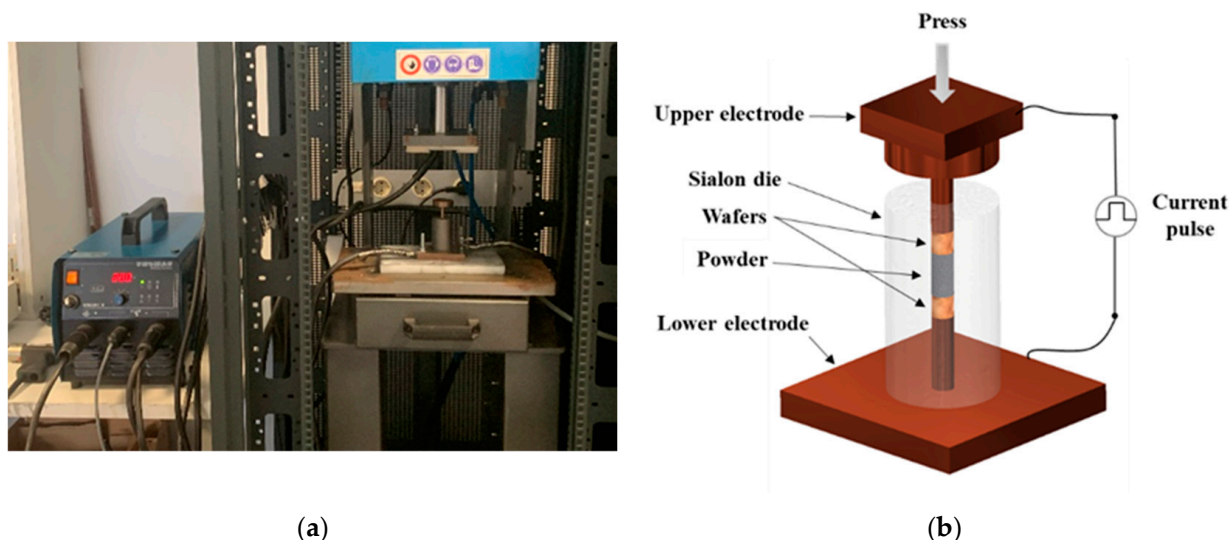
(a) Stud welding equipment and pneumatic press used in the experiments. (b) Scheme of the sintering assembly, including electrodes and die, used in the CEDS experiments.
